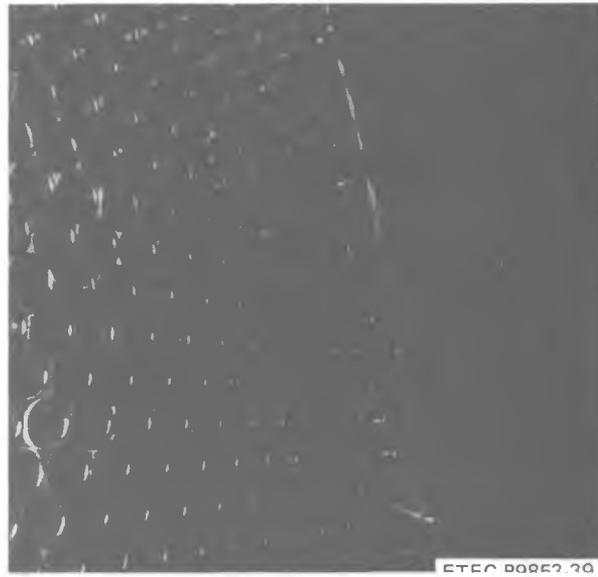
Plugging of the Inlet Tubesheet, Starboard Side
